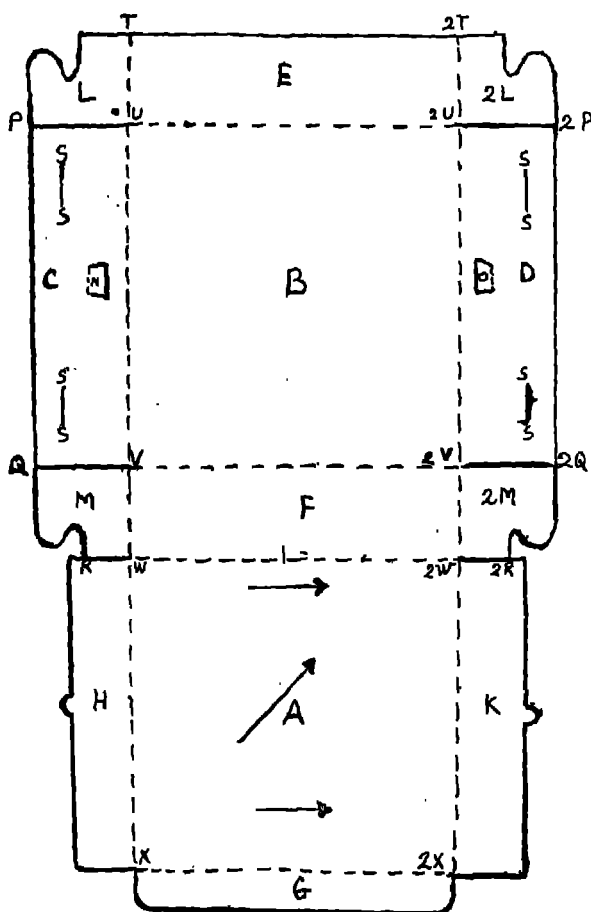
POPULAR SINGLE-PIECE CONFECTIONERS' BOX FOR CAKE PACKING.
